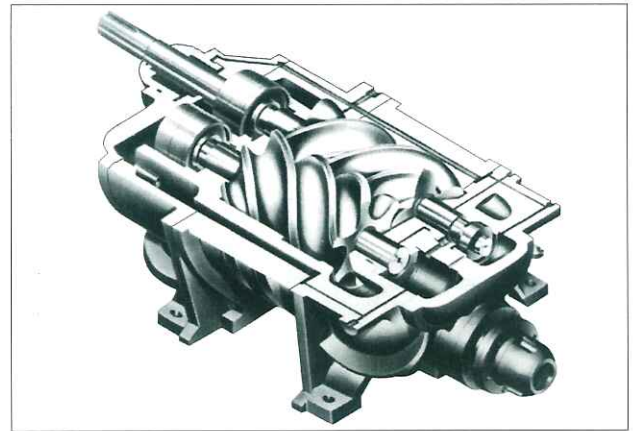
S.T.D. Screw Compressor, Oblique Sectional View
